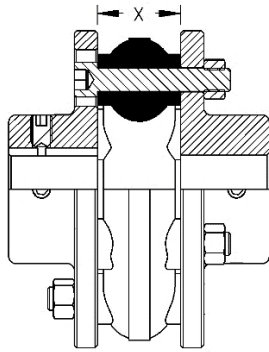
SUPER FLEX ASSEMBLY GAP
